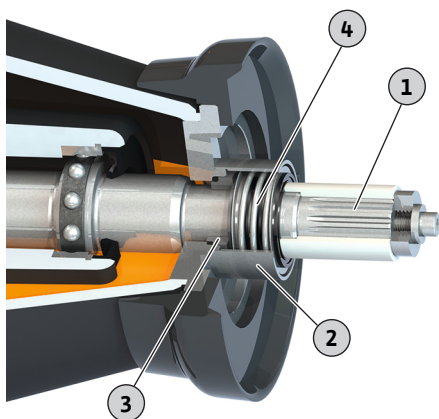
Flumen OPTI-RZP/EXCEL-RZPE 50 ... 80 mechanical seal replacement
